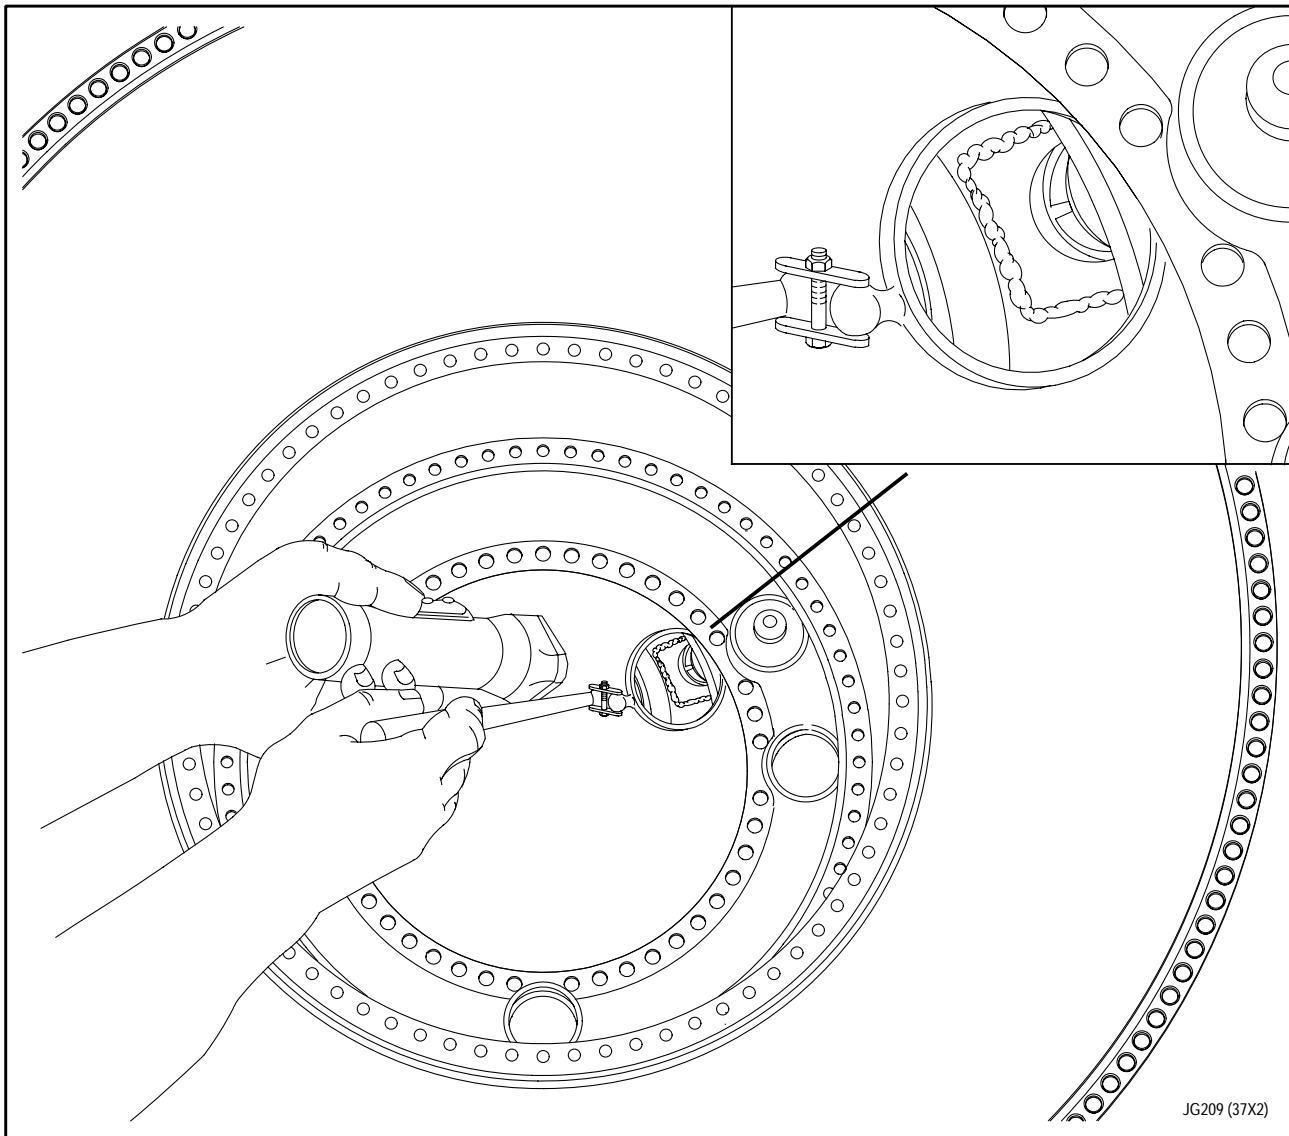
Diffuser Case Assembly - Oil Pressure Tube Metal Seal Ring Check
